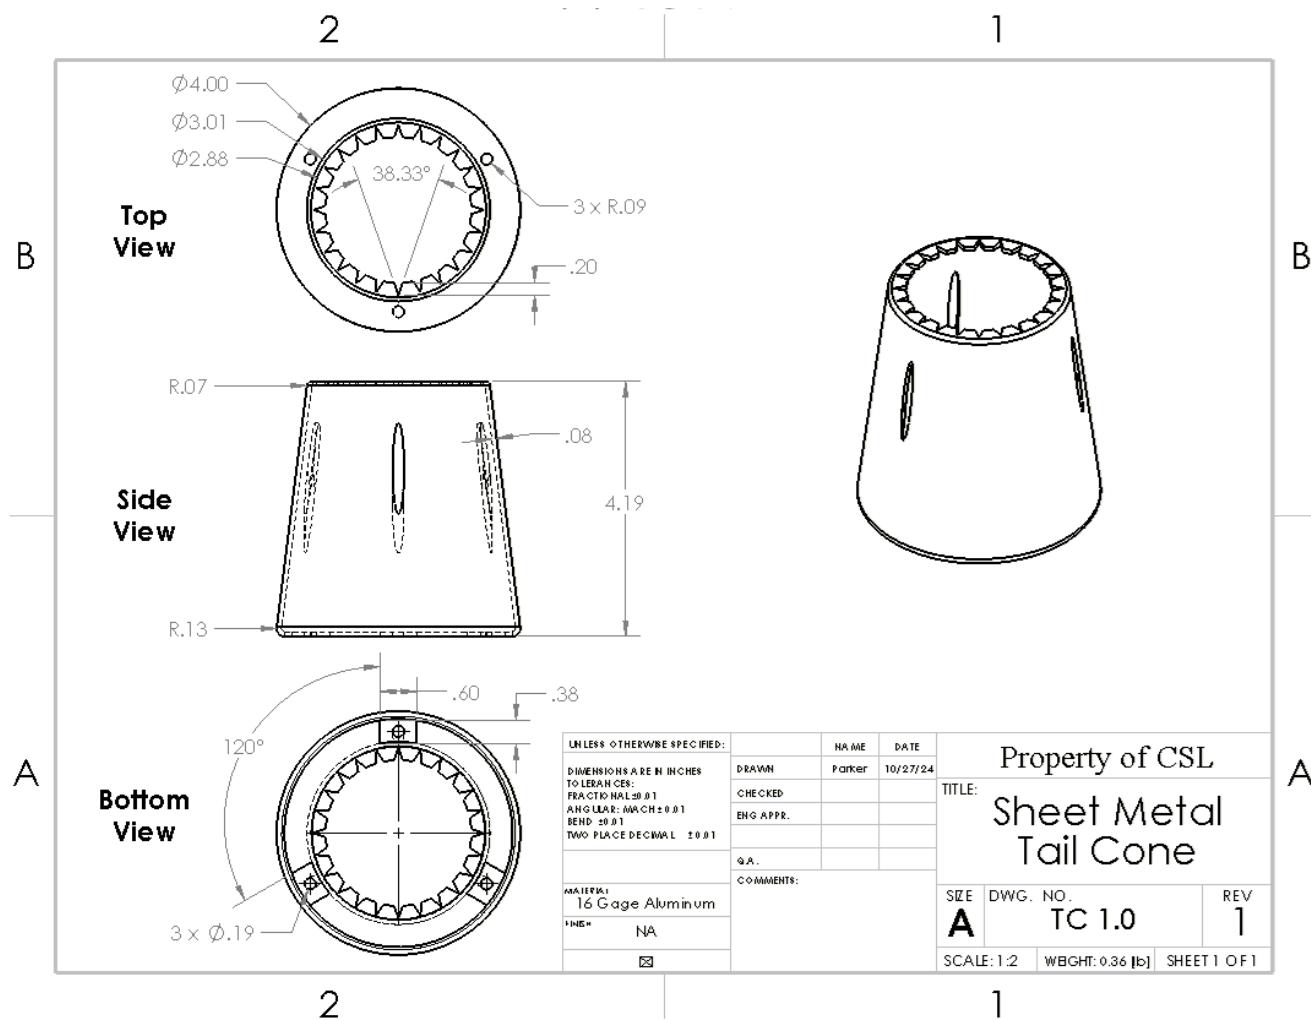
Leading Tail Cone Alternative Drawing.
